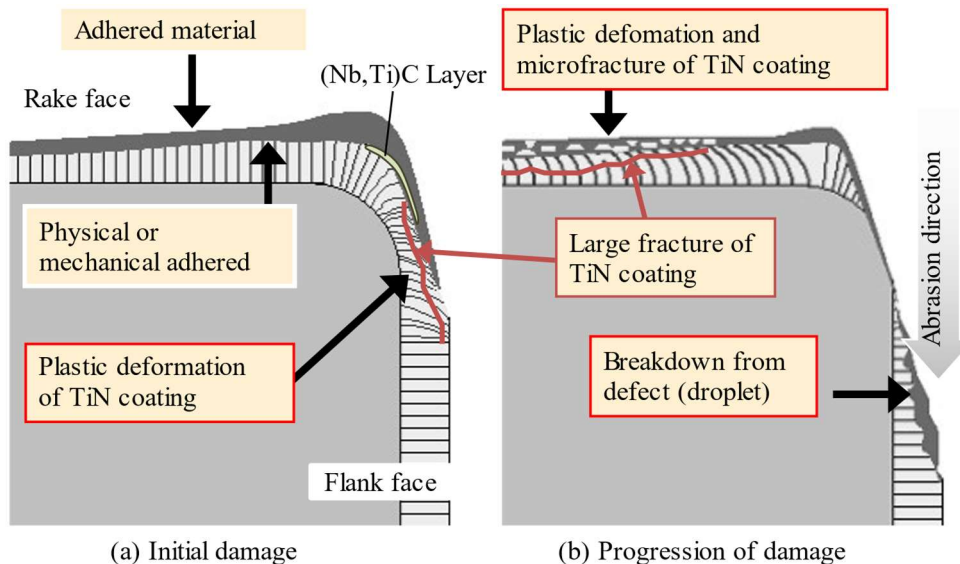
Damage model of TiN-Arc coated cutting tool while turning of Alloy 718.
